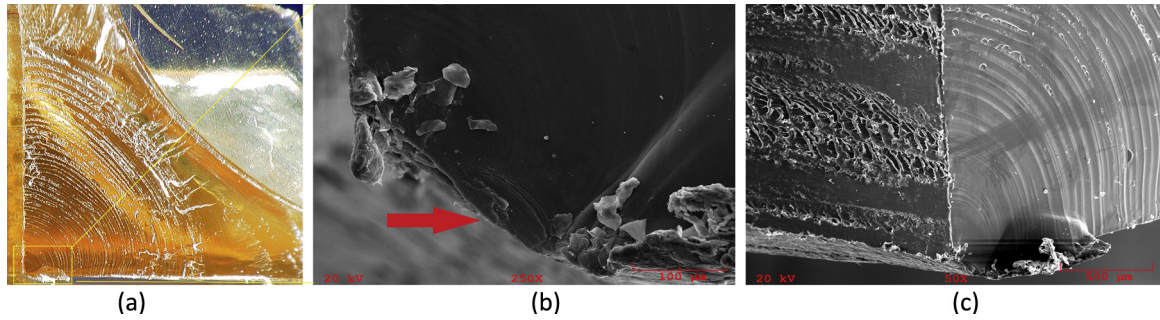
(a) Light microscopy image of right side fracture face reveals macroscopic Wallner lines and location of fracture origin. (b) High magnification SEM image of fracture origin shows faint fatigue striations. (c) Oblique view of fracture origin reveals bore defects along inner diameter which could contribute to premature failure.
